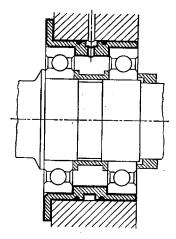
Sealing oil hole with rubber rings in antifriction bearing unit
